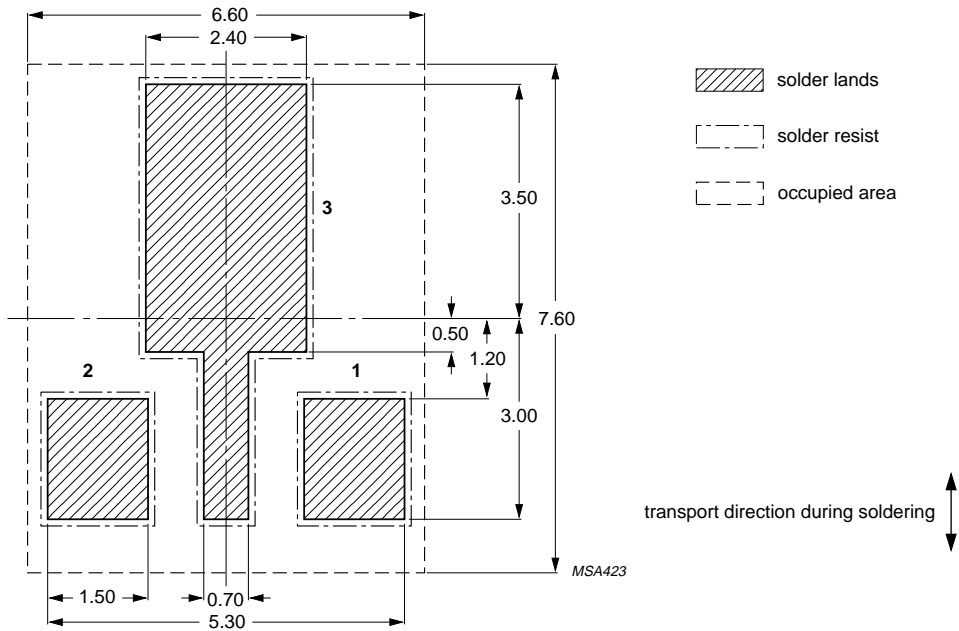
Wave soldering footprint for SOT23; typical dimensions.
